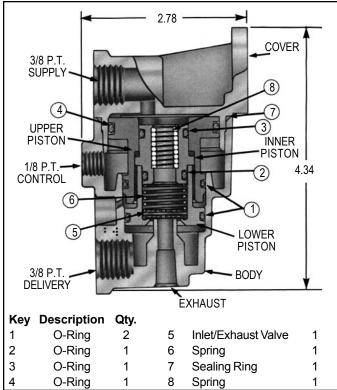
BP-1™ REAR BRAKE PROPORTIONING VALVE CUTAWAY VIEW
